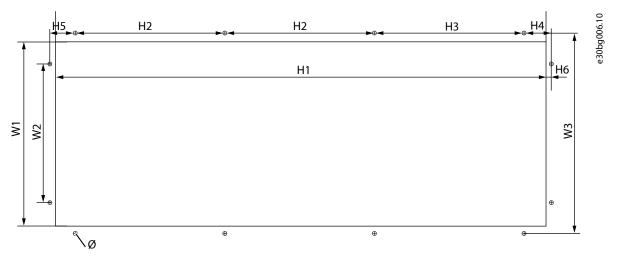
Dimensions of the Opening and Drive Outline with Flange, FR7
